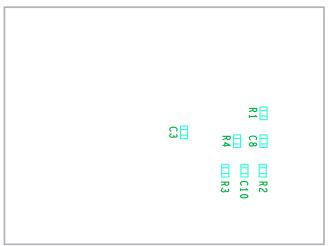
BOTTOM COMPONENT ASSEMBLY (MIRRORED)
